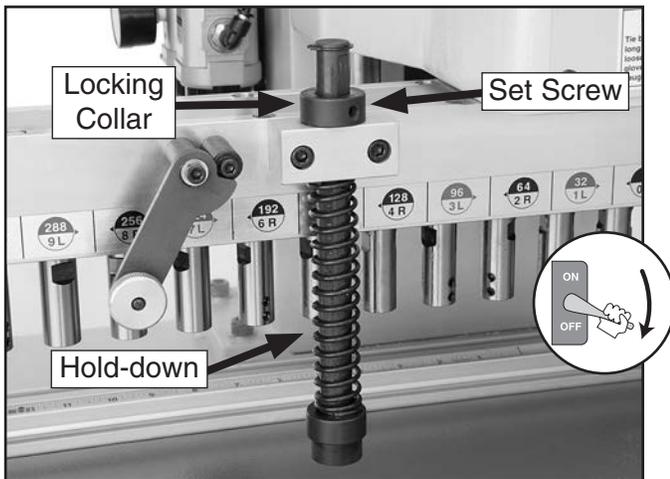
Workpiece hold-down (front boring head guard removed for photo clarity).
